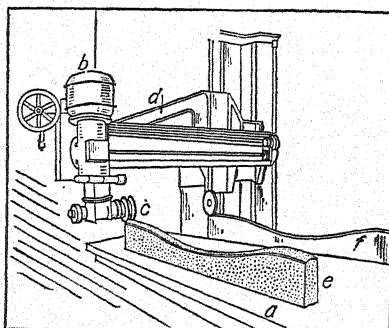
Stone-moulding-cutting machine. *a.* Table or bed. *b.* Motor. *c.* Carborundum wheel. *d.* Arm. *e.* Block of stone. *f.* Template. (Courtesy of Patch-Wegner Company, Inc.)
